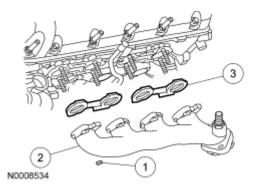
Identifying LH Exhaust Manifold Courtesy of FORD MOTOR CO.
